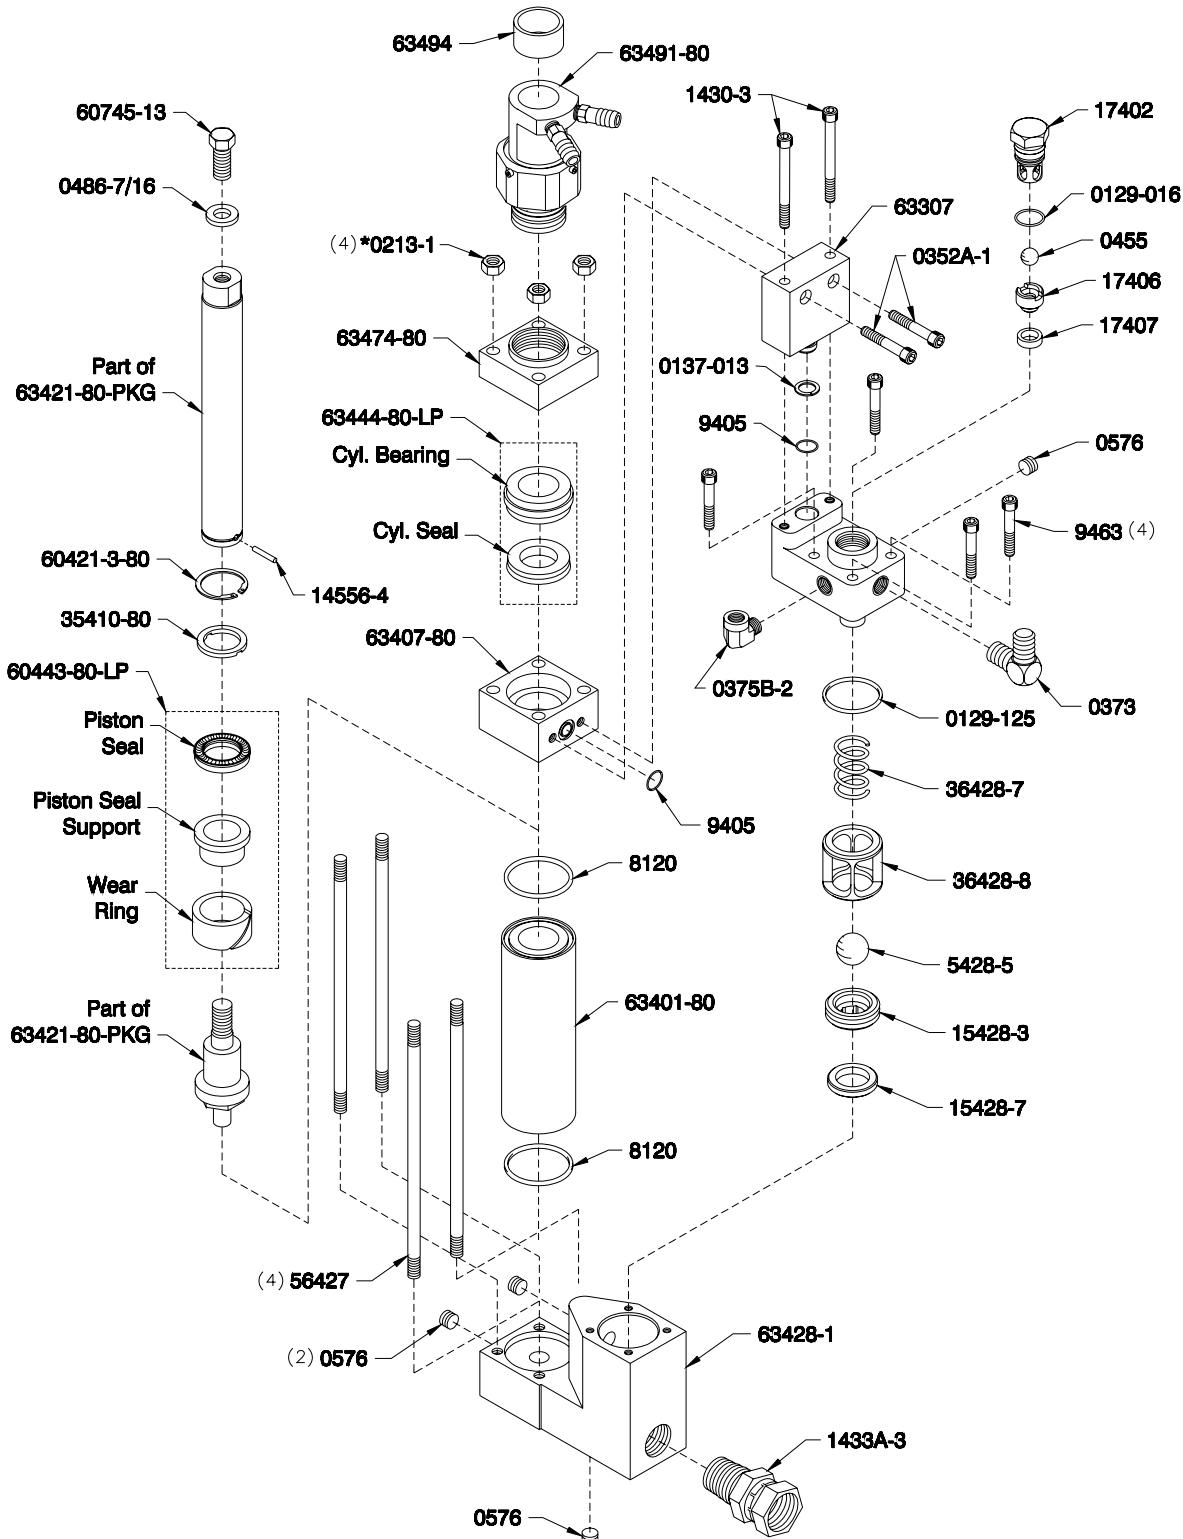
A-Proportioning Pump Assembly (Part No. 63450-80), Exploded View
